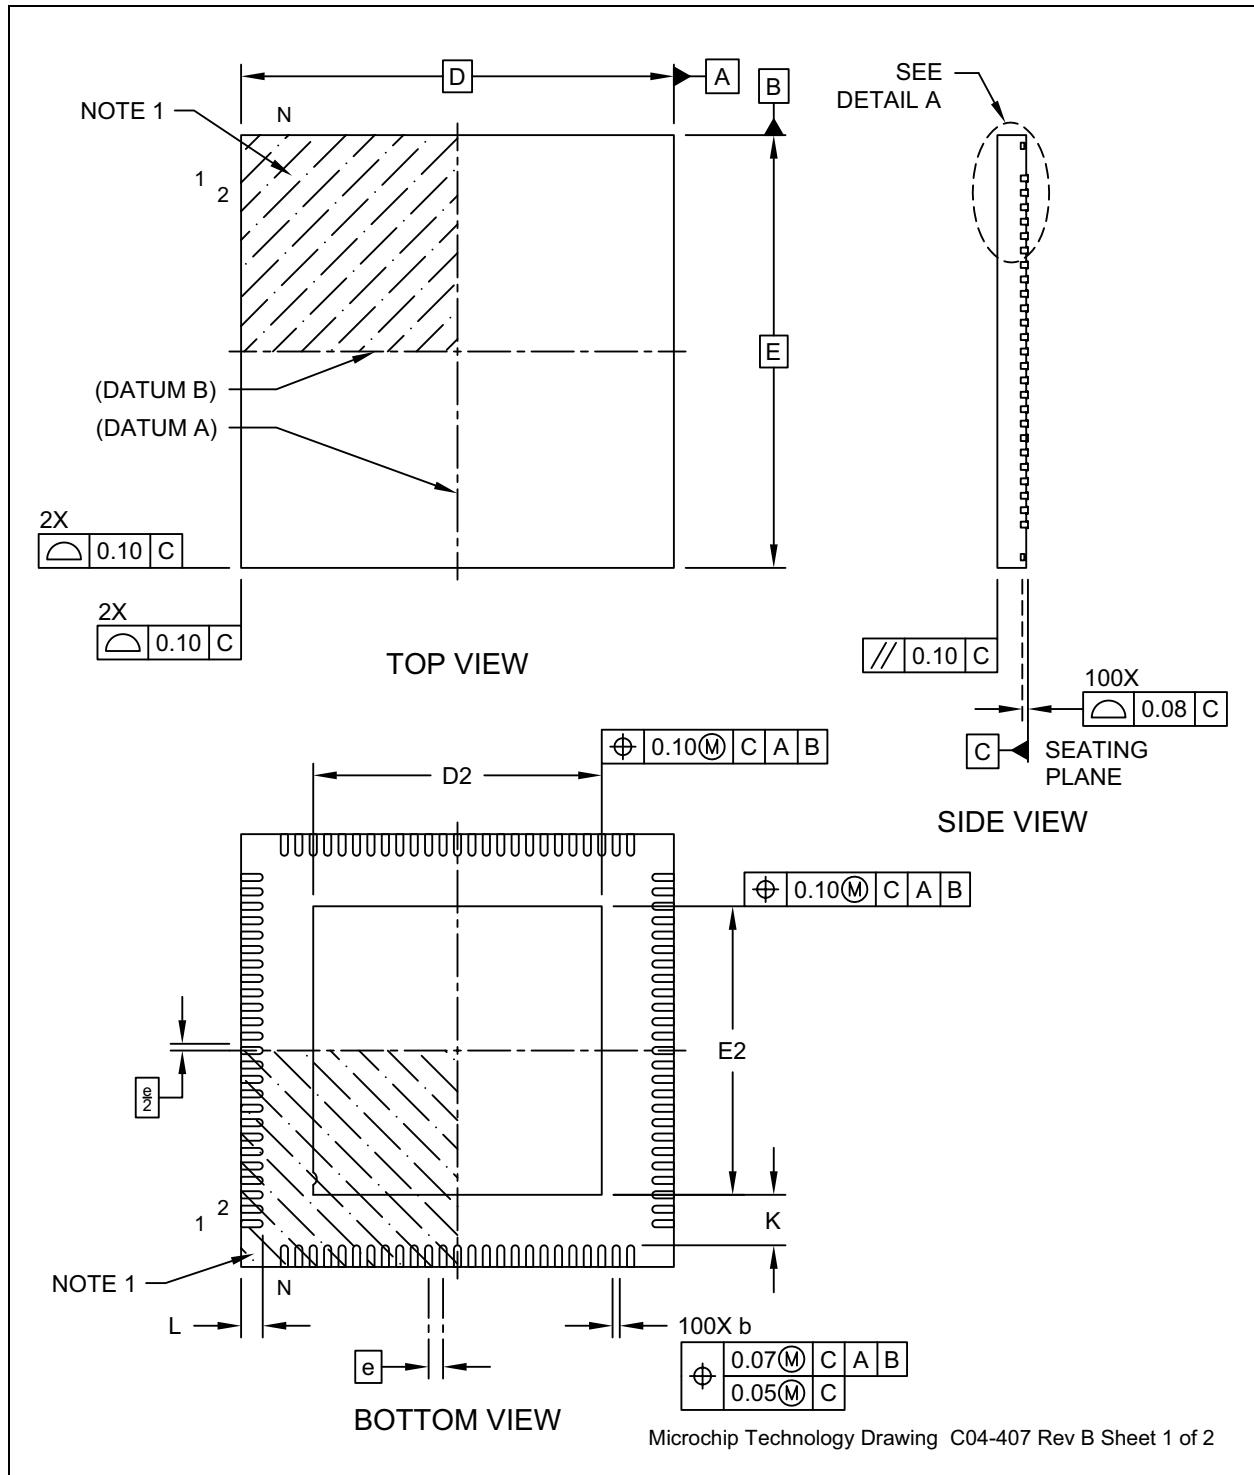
100-VQFN PACKAGE (DIMENSIONS)
